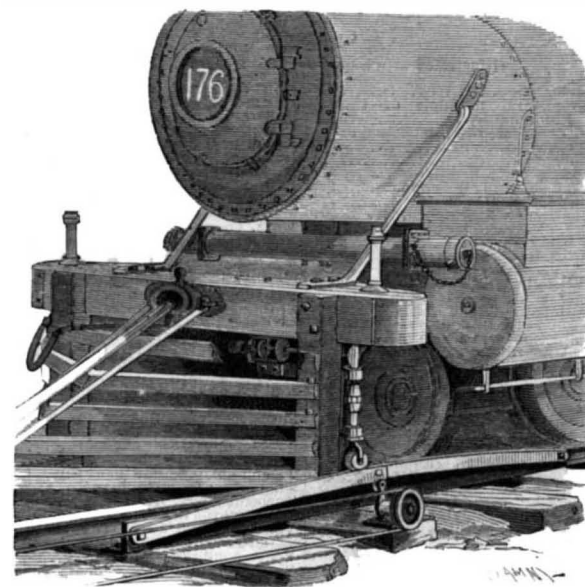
DETAILS OF ATTACHMENT TO LOCOMOTIVE, SHOWING MANNER OF STOPPING TRAIN.
